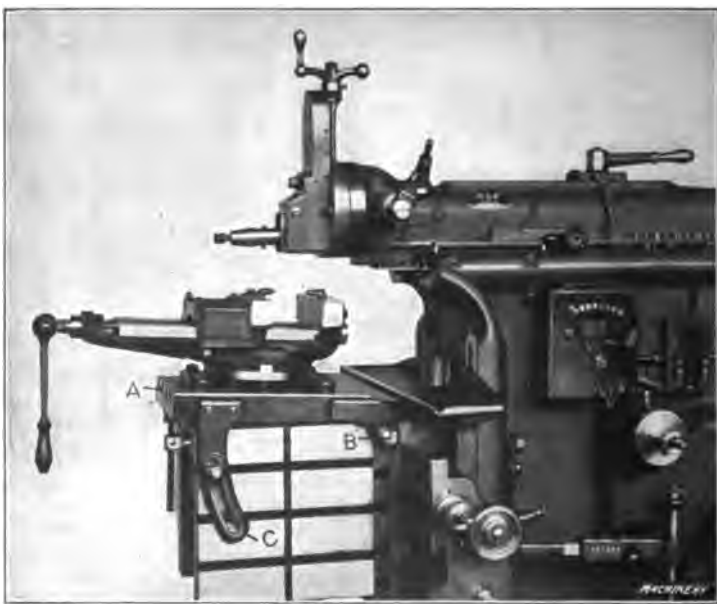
Shaper Equipped with Tilting Table and Automatic Vertical Feed
